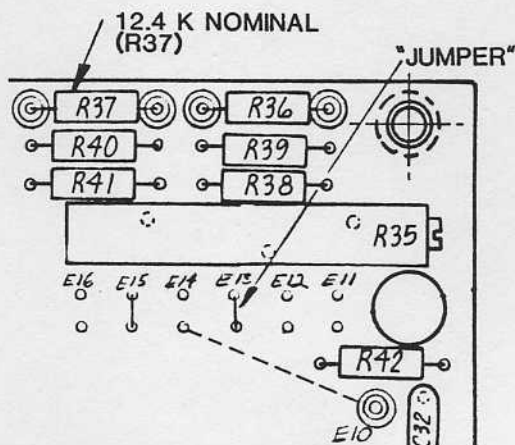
Location of Frequency Correction Compensation Jumper on Synthesizer Board Assembly.
